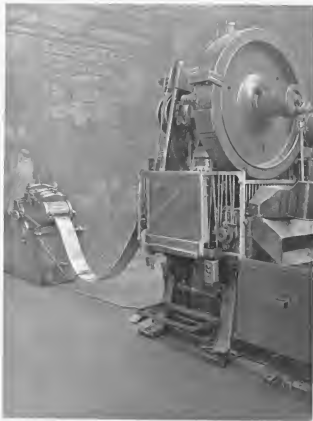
Combined coil eraser and straightening rolls feeding roll feed press.
